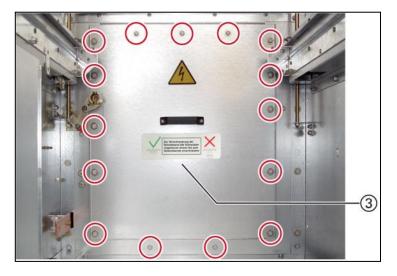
15 bolted joints on partition in circuit-breaker panel, panel spacing 800 mm
